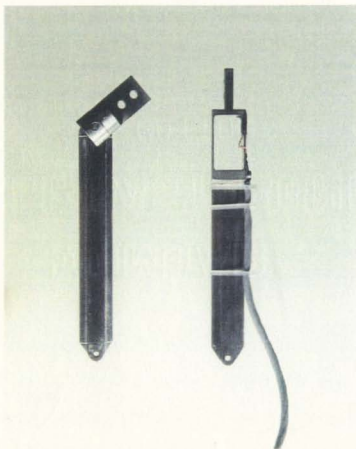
Photograph of the lower faired section of the drive shafts. The forward drive shaft (part No. 3 and 4) is shown to the left hand side of the page while the aft drive shaft (part No. 5) is shown to the right hand side of the page.
